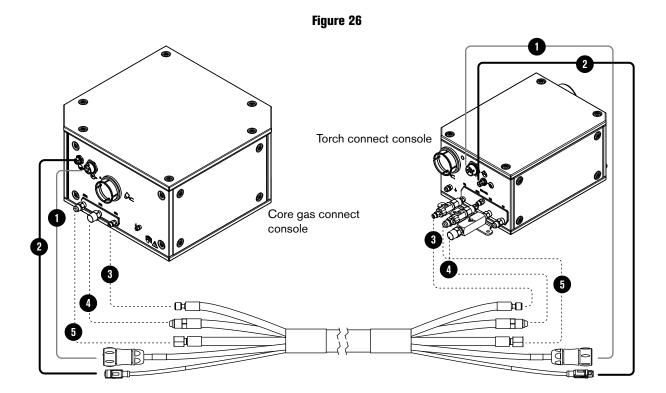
Power cable, CAN cable, and 3-gas hose assembly
